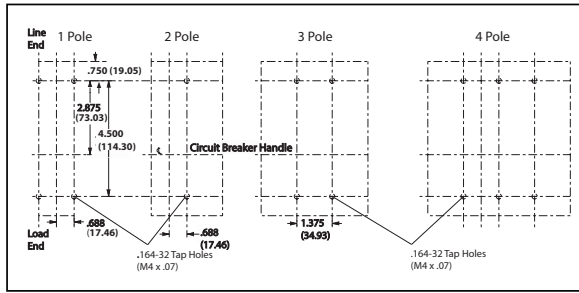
Circuit Breaker Mounting Bolt Drilling Plans
